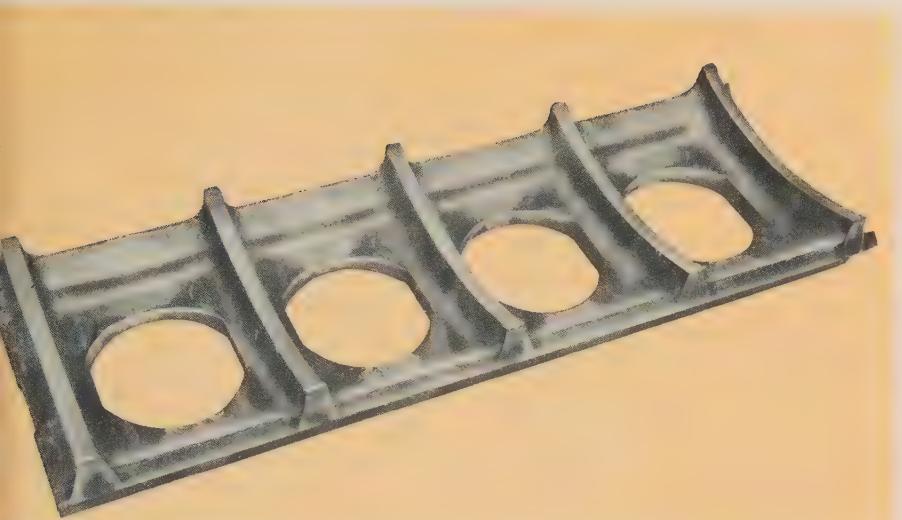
The outer deck sub-assembly is fabricated from five identical steel forgings, flash butt-welded together end-to-end with no pre-machining. The excess material left at each end of the sub-assembly is removed by an oxy-acetylene flame-cutting operation. Four outer deck sub-assemblies are required for each completed crankcase assembly.
